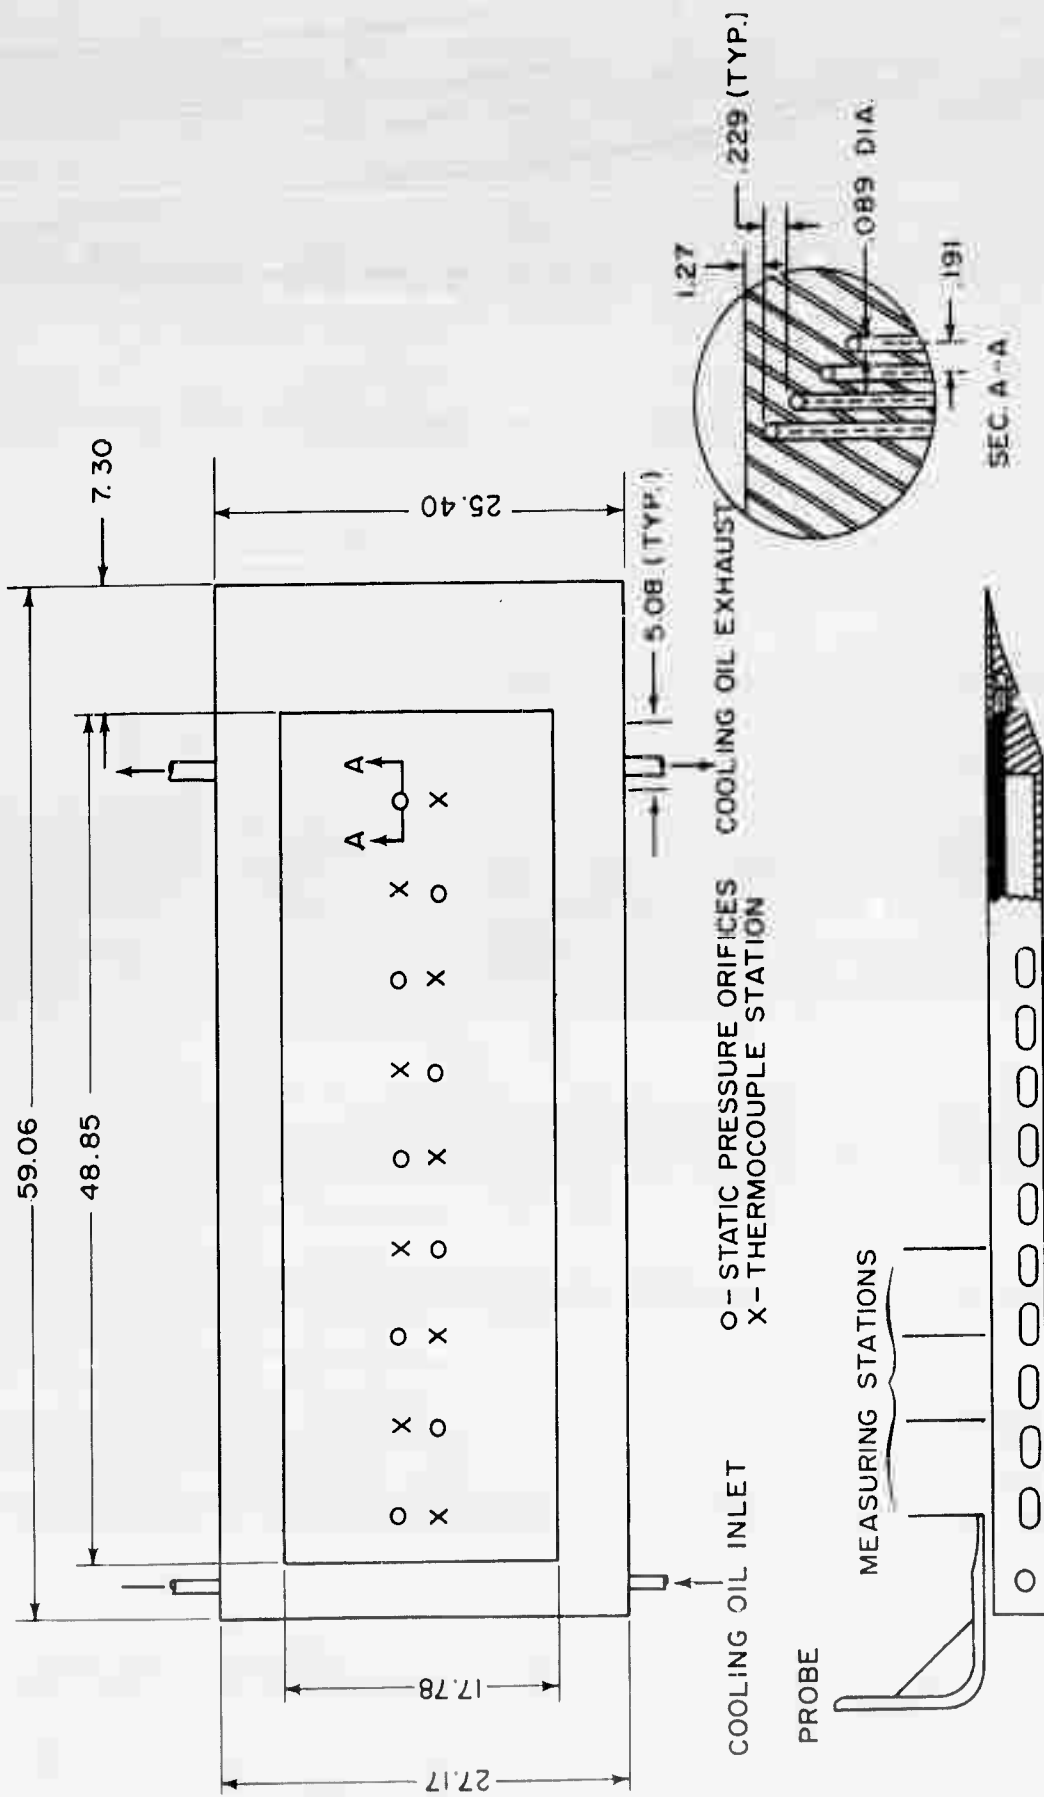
SKETCH OF MODEL (ALL DIMENSIONS IN cm)
